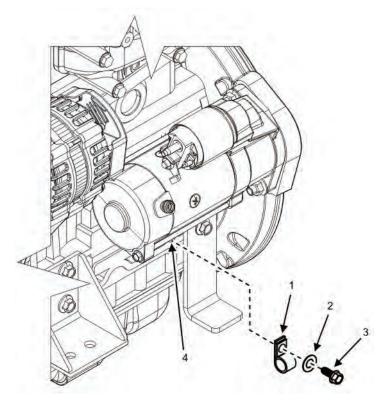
Electrical Connector Clamp Exhaust Side — Removal.
